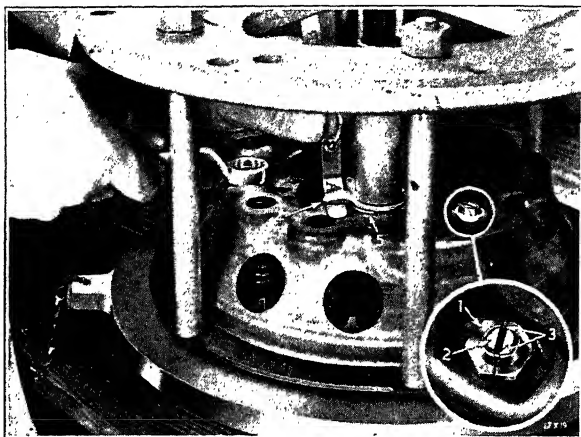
Dodge, Chrysler, De Soto, and Plymouth Clutch Showing Release Lever Adjusting Fixture
